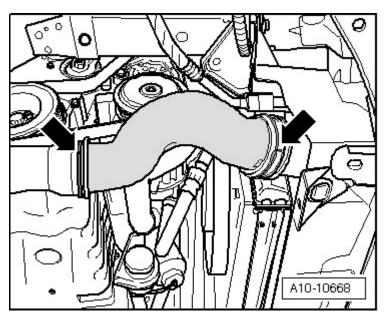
Removing Crankcase Ventilation Hose At Left Cylinder Head Cover
